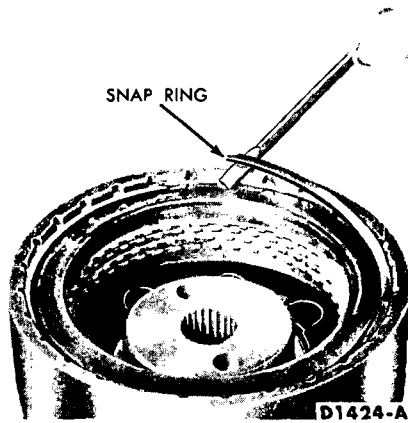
Removing Forward Clutch Pressure Plate Snap Ring
